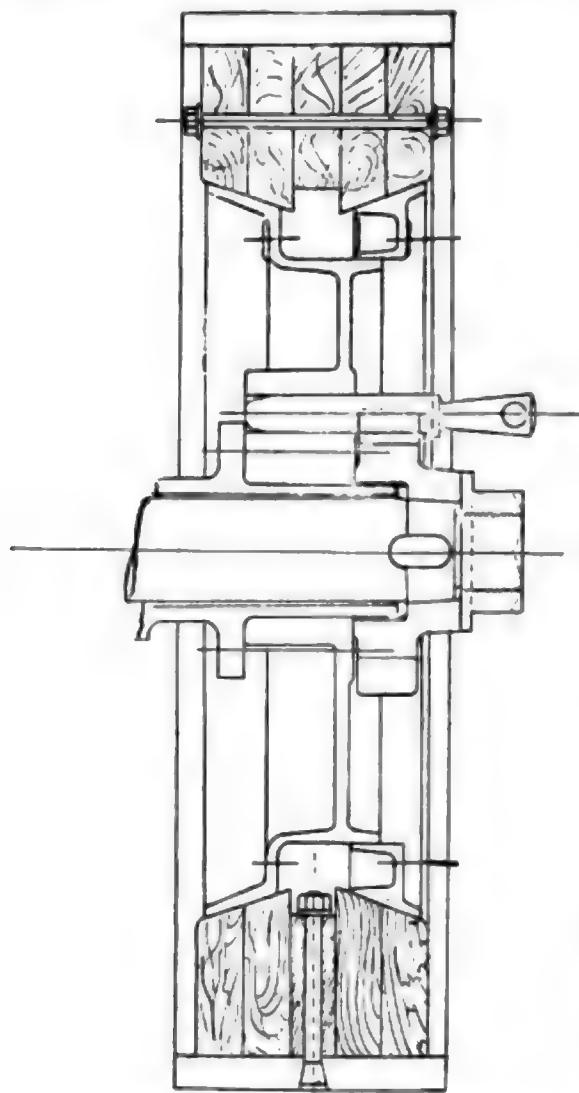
ROAD WHEEL AND LOCKING PIN.
